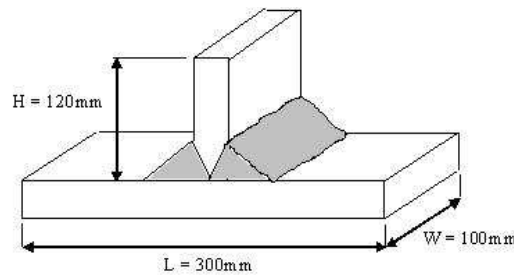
Fatigue specimen - SAW full penetration fillet welded ‘T’ joint
